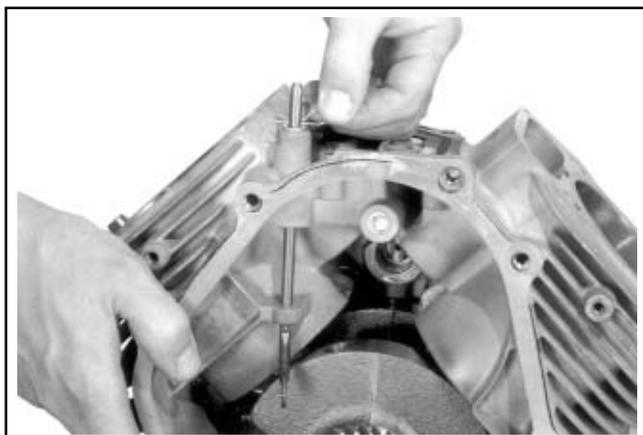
Removing Governor Cross Shaft Hitch Pin (6 mm Shaft Design).
